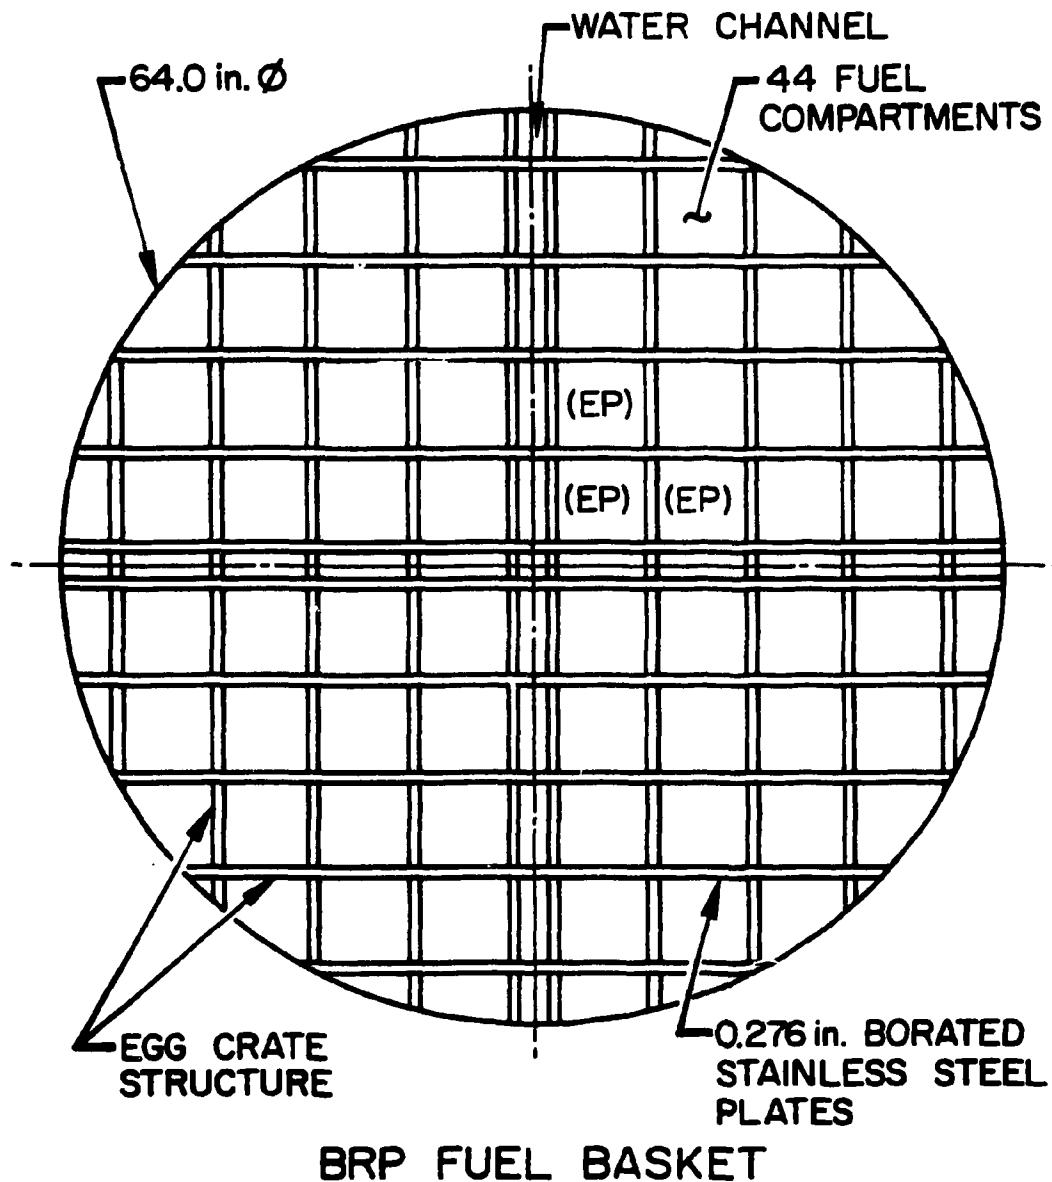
Location of EP fuel assemblies for case BRP4 loading.
